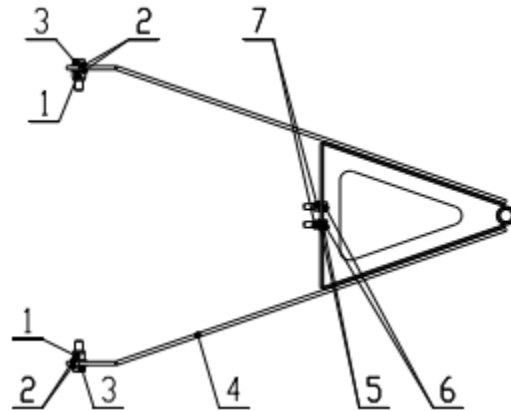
Tailwheel Adjusting Bracket and Fittings
